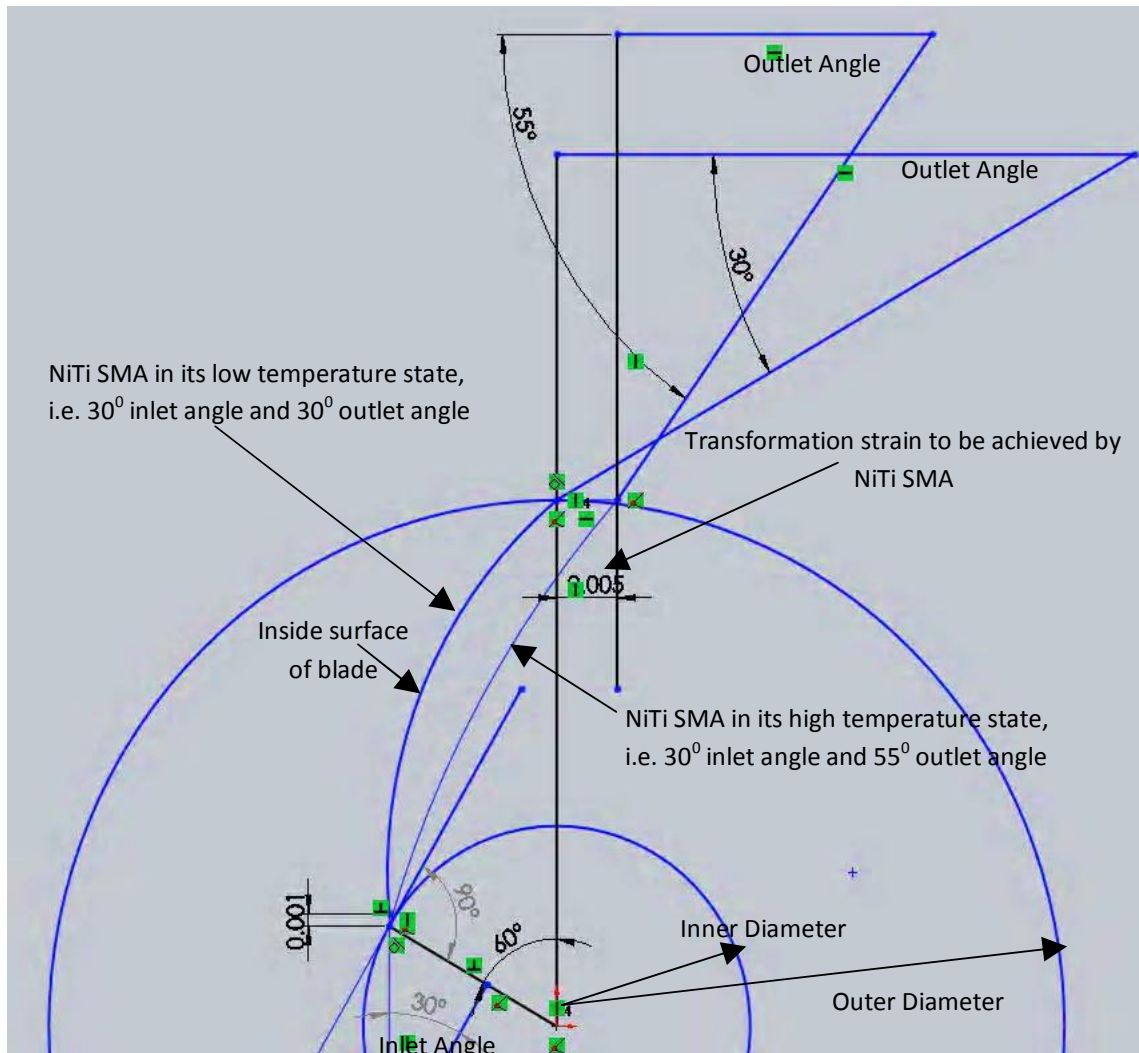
Operating mechanism of the Shape Memory Smart Impeller
